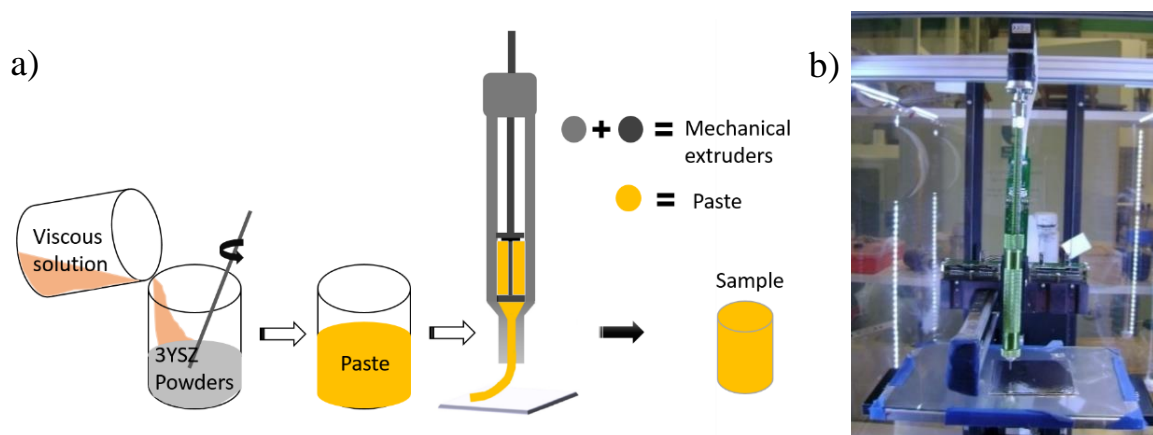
a) Representative scheme of paste production and its printing process; and b) Printer extruder.
